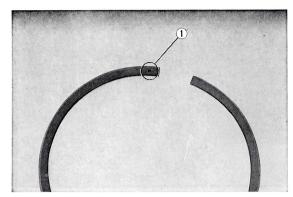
Identifying upper and lower surfaces of the piston ring
